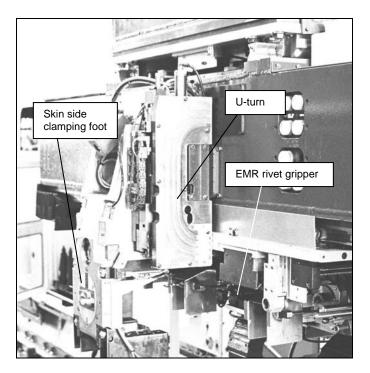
Rivet U-turn on pre-SA2 LVER machine.
